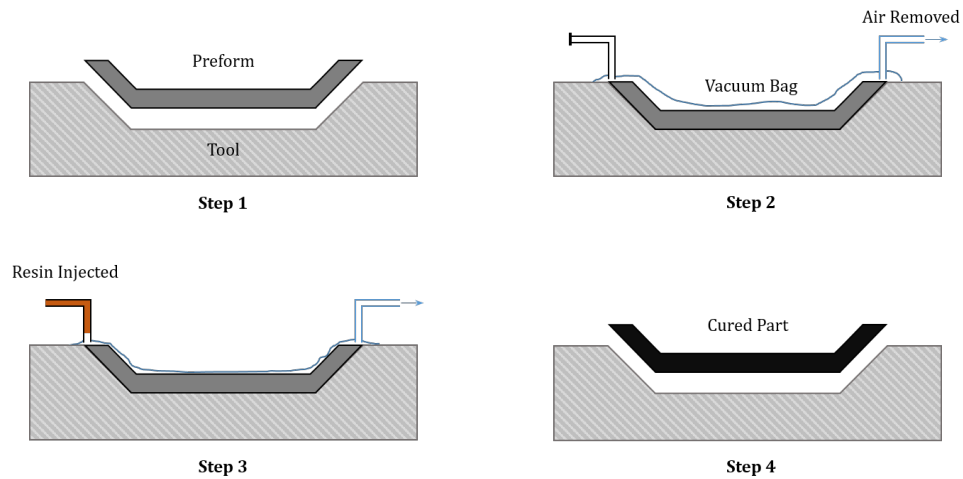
Schematic of vacuum forming process in which resin is drawn into a dry preform using a vacuum[45]
